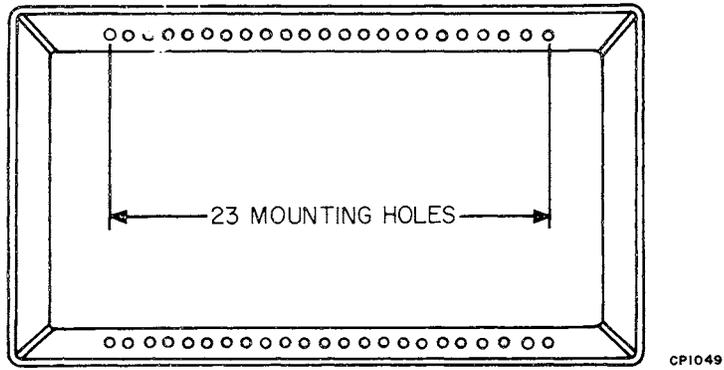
Floor Stand Assembly, Mounting Hole Arrangement.
